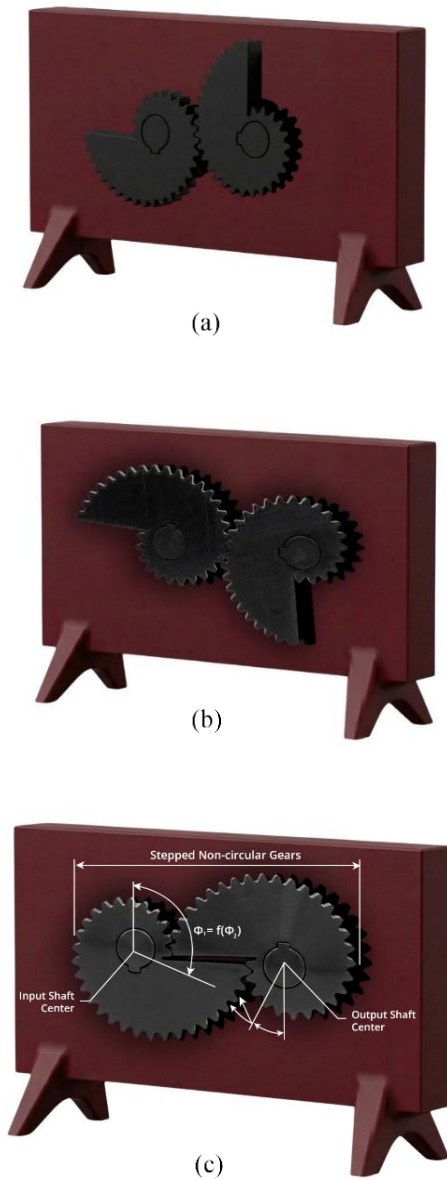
Experimental view of a pair of logarithmic spiral spur gears produced using an additive manufacturing method: (a) start of contact, (b) mid-contact position, (c) end of contact
